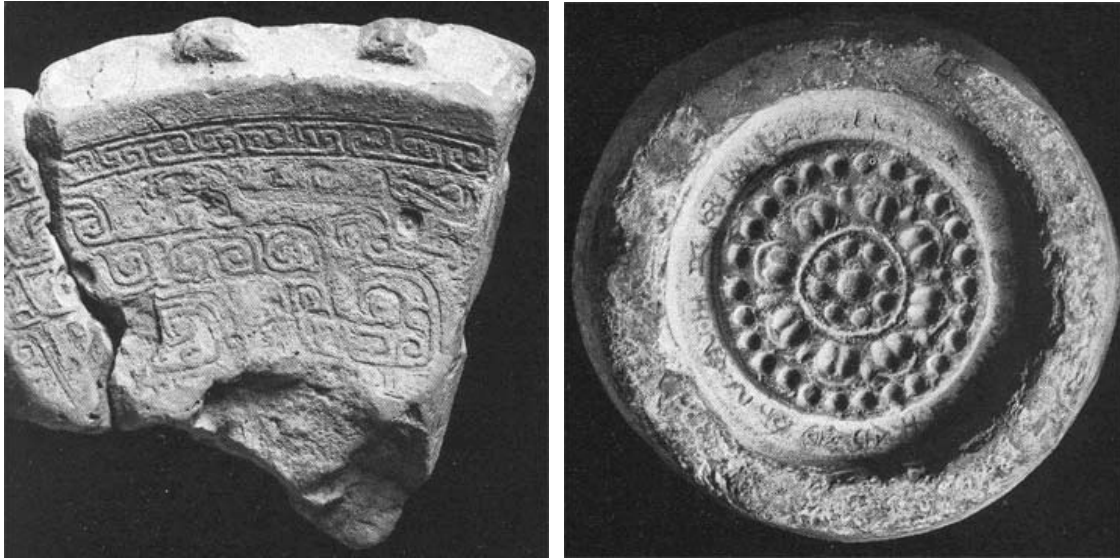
a) Piece of clay mold used for casting coins, Han dynasty, Henan Province; b) Piece of clay mold used for casting a *fang yi* from c. 1100 BC [4].
